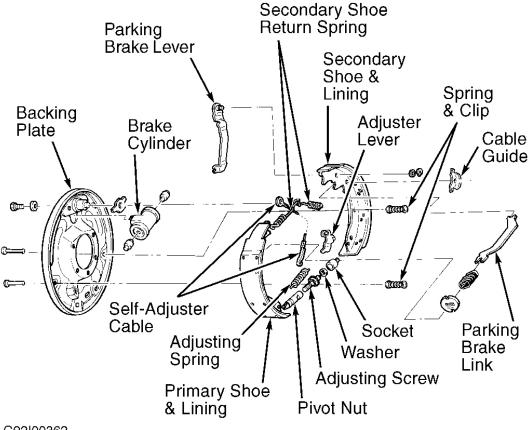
Identifying Rear Brake Assembly Components (B2300, B3000 & B4000) Courtesy of FORD MOTOR CO.
